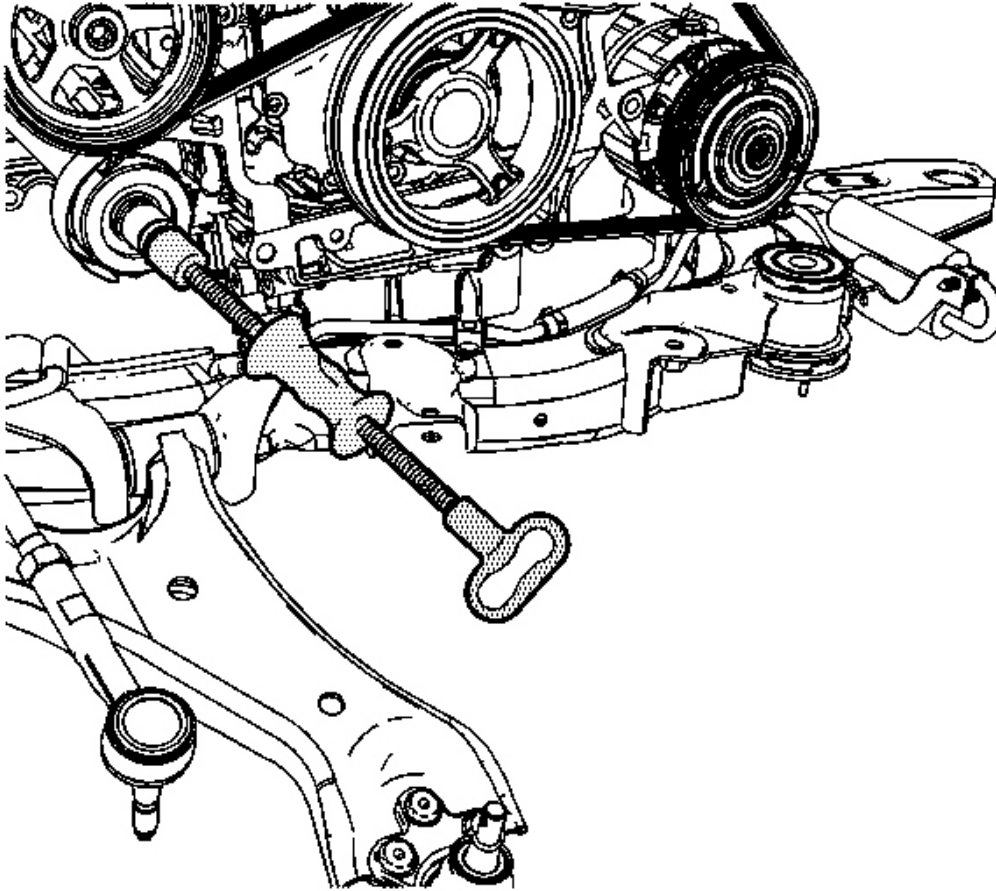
Identifying Special Tools - J 44467 & J2619-01
